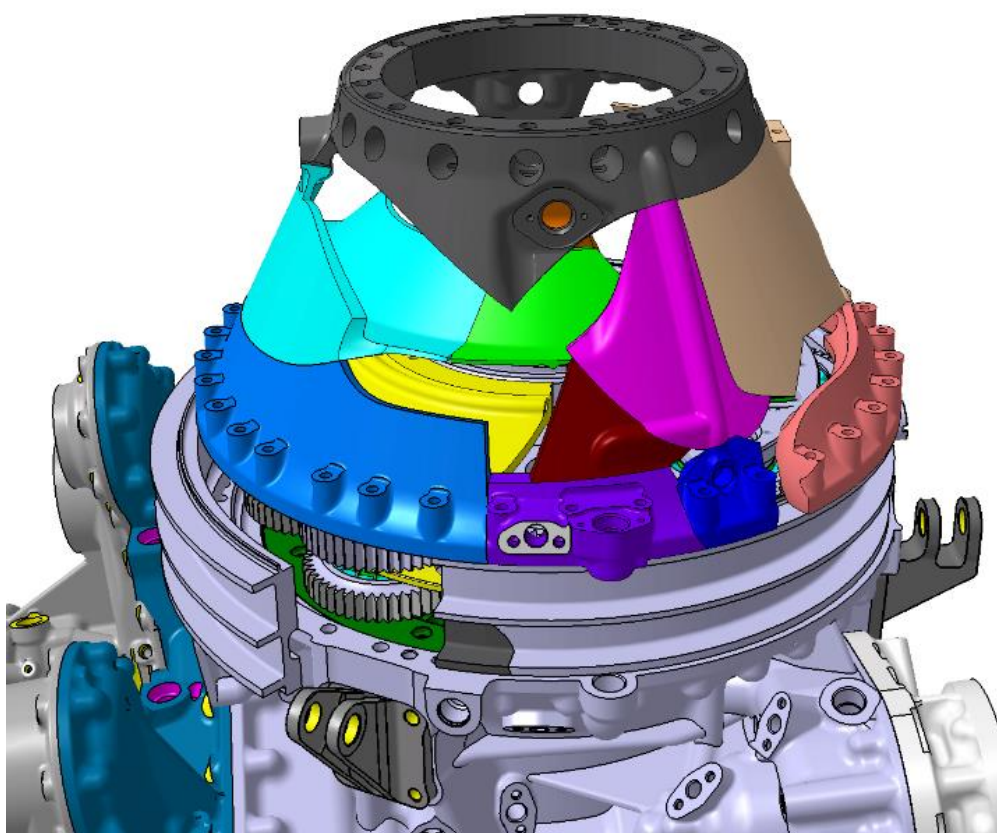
Illustration of how the retrieved fragments of the Conical Housing are pieced together in order to look for break-up sequence/mechanism. Illustration: Airbus Helicopters
